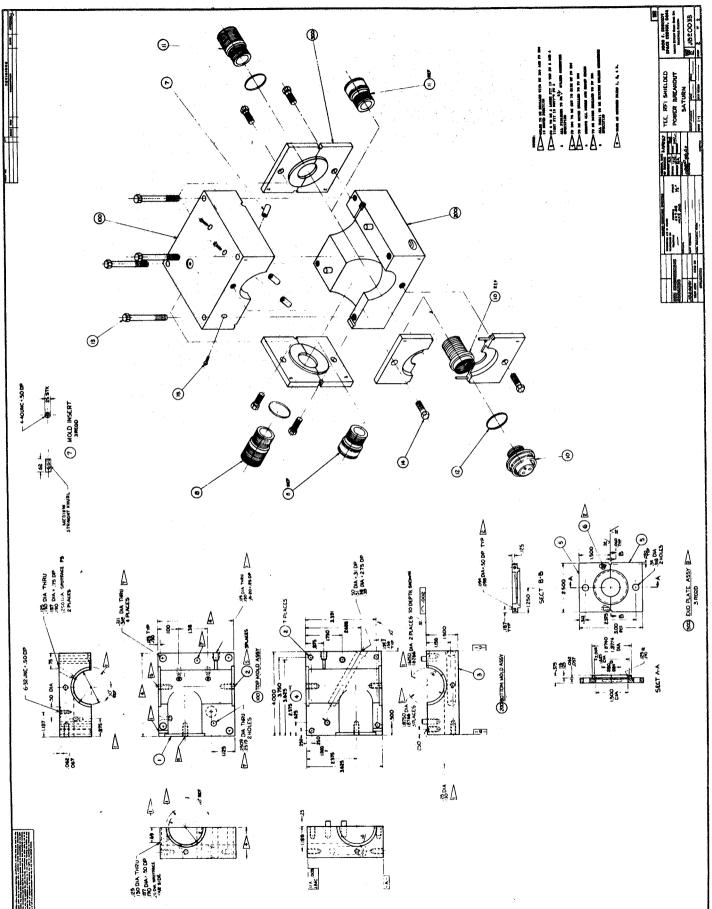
Molded Tee Adapter (Sheet 2 of 2)
